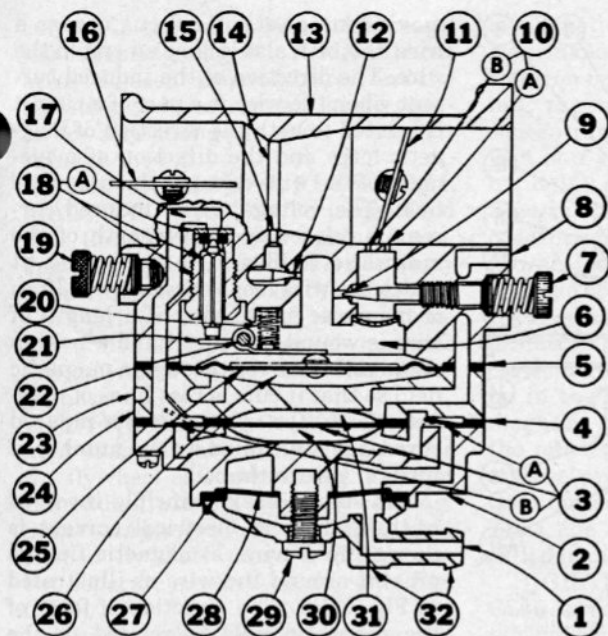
Cross-sectional schematic view of Tillotson series HL diaphragm carburetor. Some models of this type carburetor are equipped with an accelerator pump.
